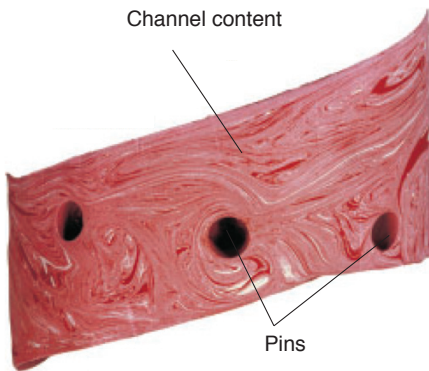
Pin mixing section on the screw of a single screw extruder
